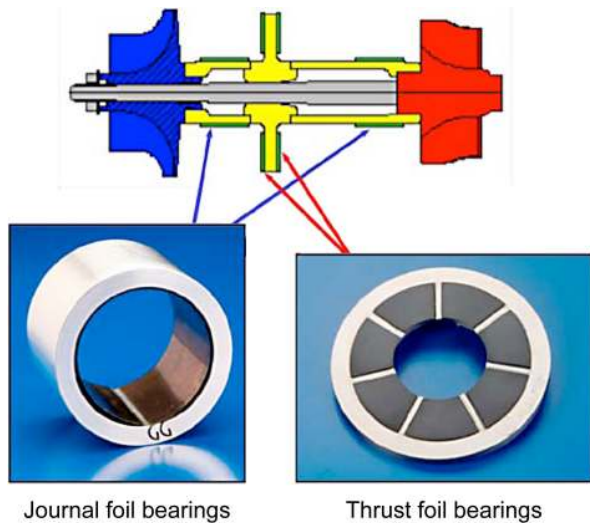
Journal and thrust foil bearings used to control radial and axial shaft motion, respectively.
